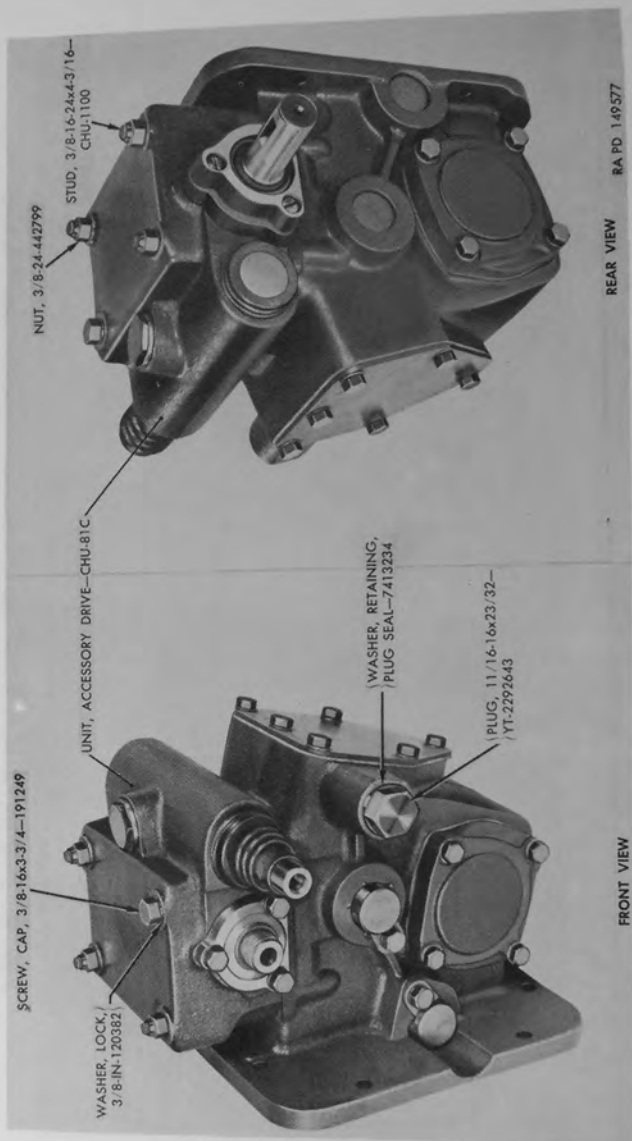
Front and rear views of power take-off equipped with accessory drive unit for operating tank truck pump.
